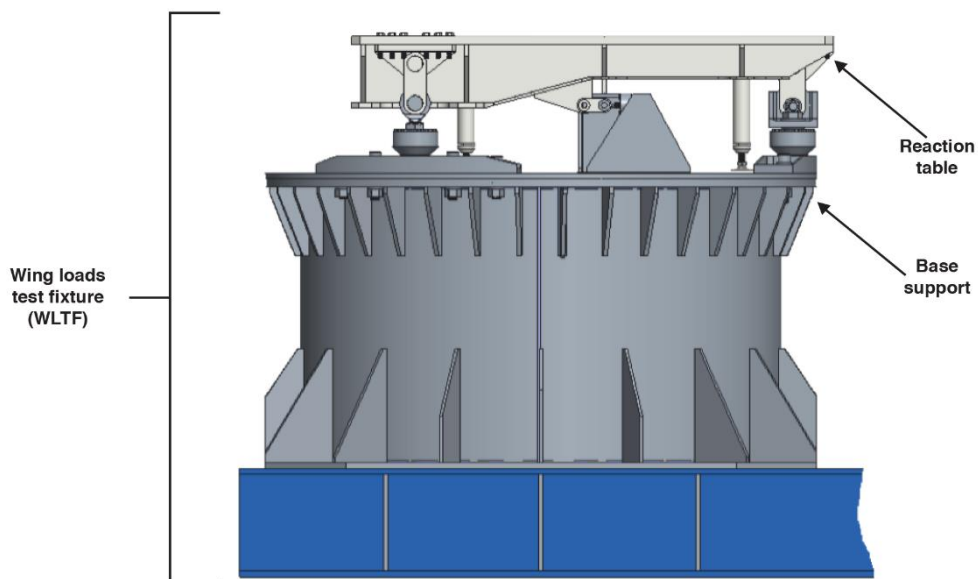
Side view of a wing loads test fixture (WLTF) – dynamically active static test fixture.
